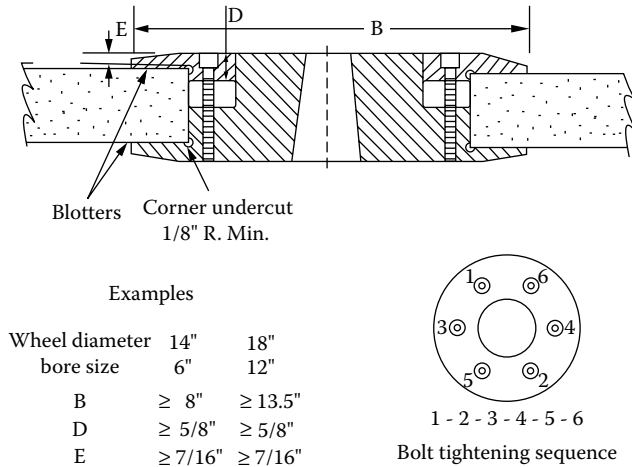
Flange design for conventional wheels and bolt-tightening sequence.
